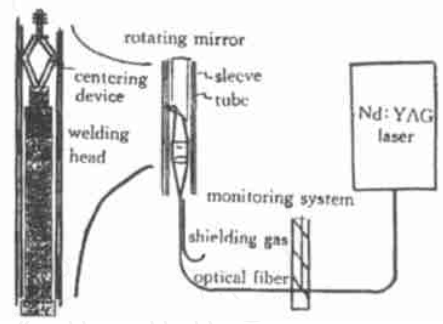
Equipment for the welding of inner wall of sleeve
